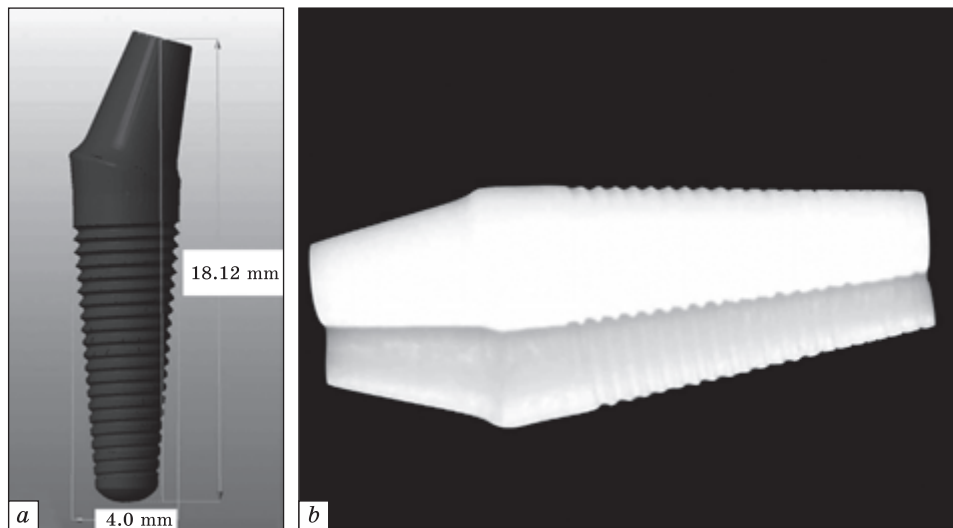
3D-CAD design of the dental implant (a), and 3D-printed zirconia implant (b) [75]
